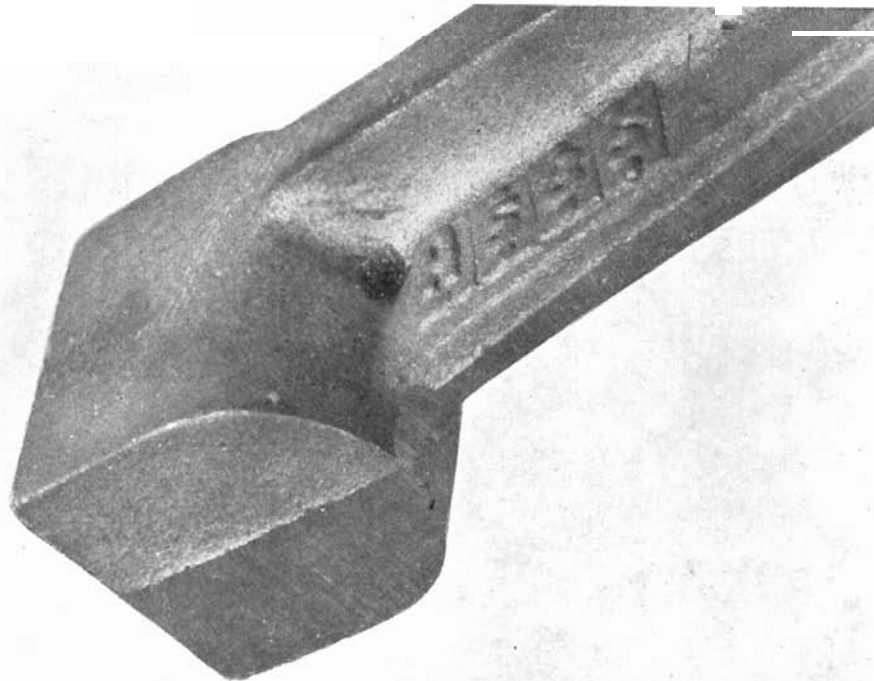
Surface shrinkage in a grey-iron casting.
